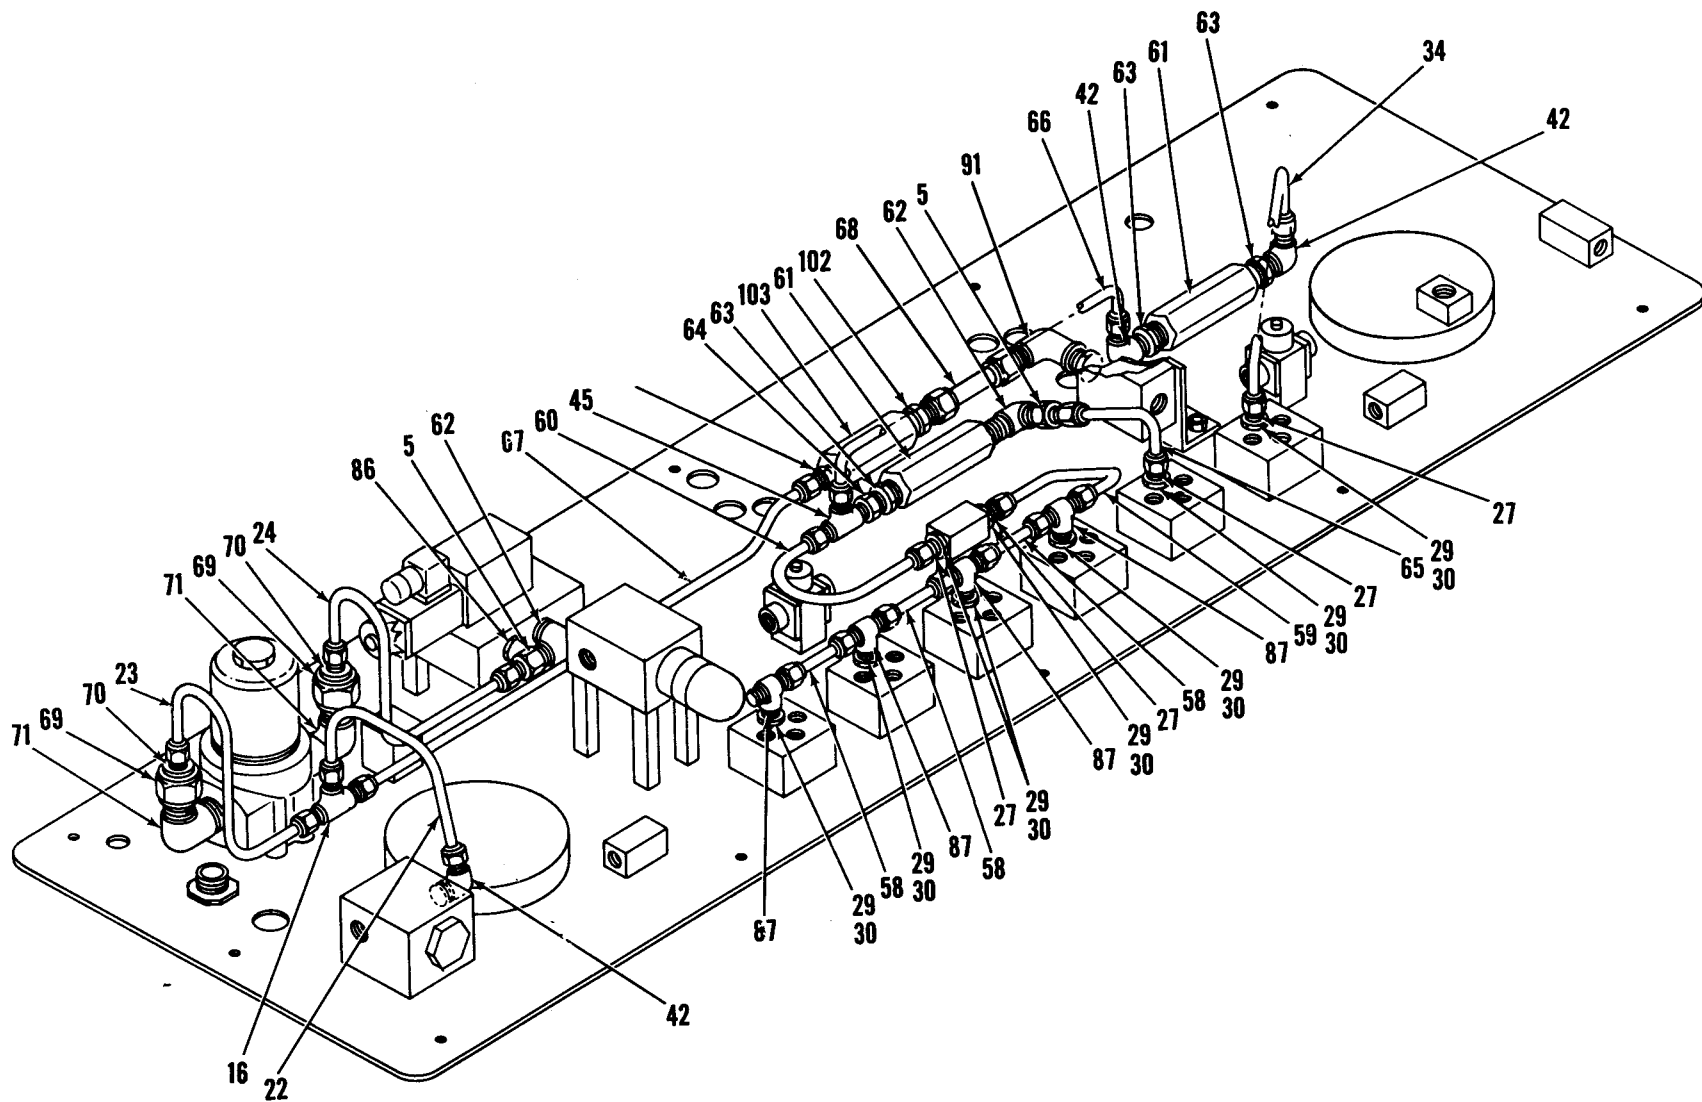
Chassis Assy, Hydraulic Unit (Sheet 3 of 5)
